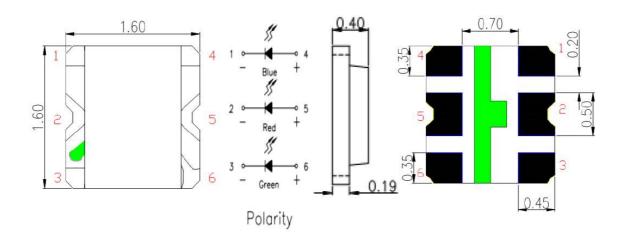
IN-S66TFT5R5G5B Solder Pattern
